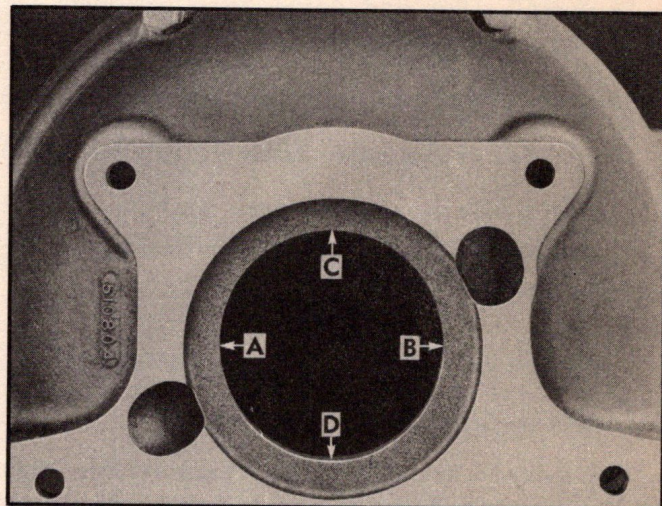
Checks for Location of Hole in Rear Flywheel Housing
